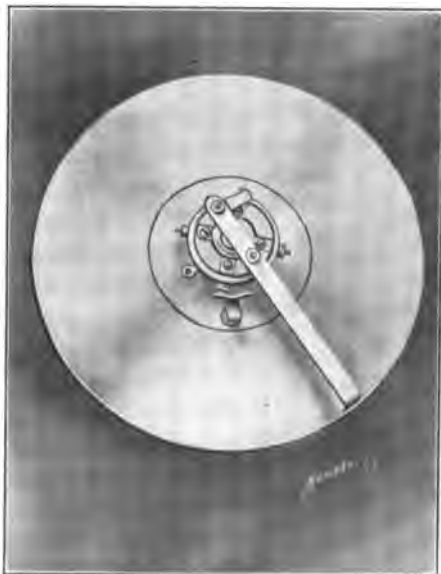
Fixture for Testing the Accuracy of Commutator Contact Points
